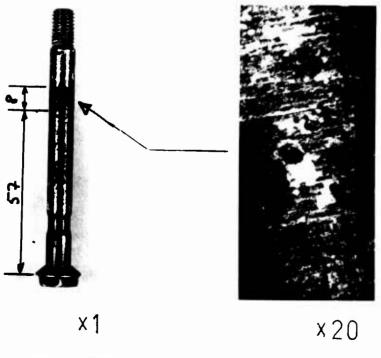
Pitting corrosion of a zinc electroplated wing bolt
